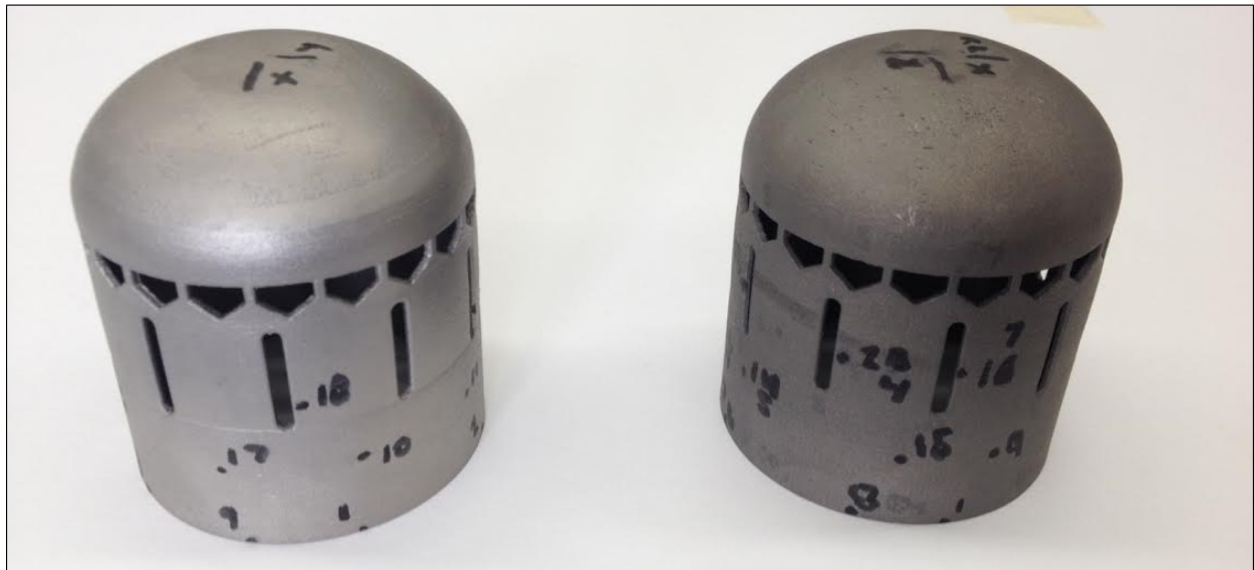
INCO 718 (left) and Ti 64 (right) test components manufactured using the DMLS (Direct Metal Laser Sintering) process.
